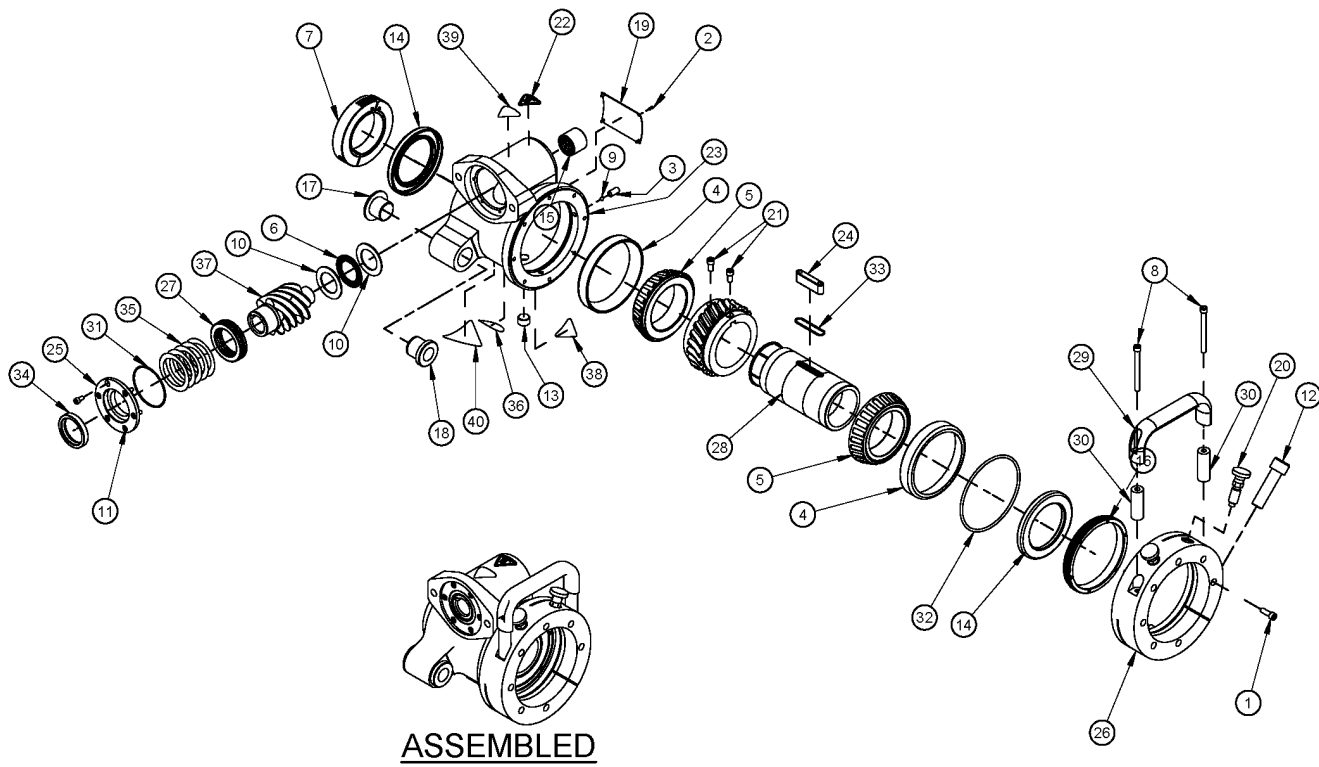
ROTATIONAL DRIVE UNIT (P/N 49684)
